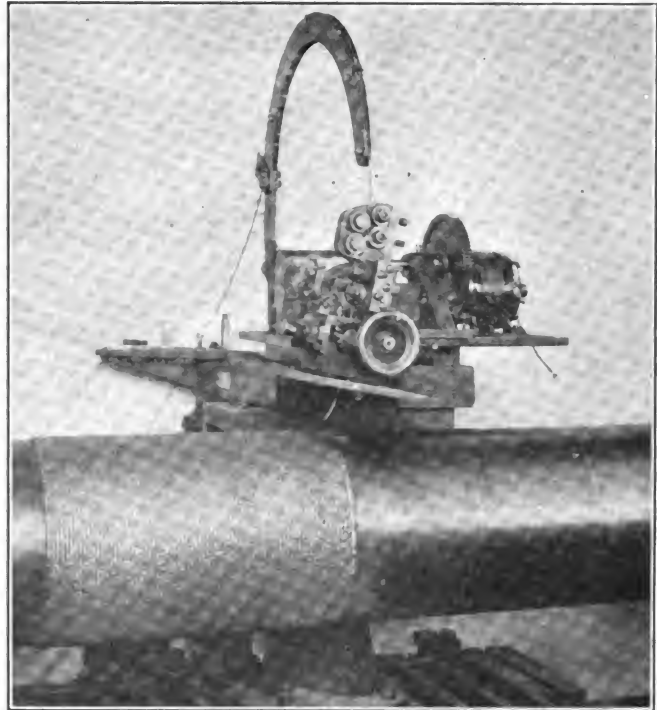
Reclaiming large shaft on which flywheel set was machined under size. This shaft was 14 in. in diameter and set was about 21 in. long. About 3/16 in. of metal was deposited on this seat in one layer and in one continuous operation. Welding figures are as follows: Current 190 amperes, arc voltage 18, electrode 1/8 in. diameter, travel 4 in. per min., rate of deposition about 2 lb. per hour. Time required—welding 16 hours, machining 4 hours
